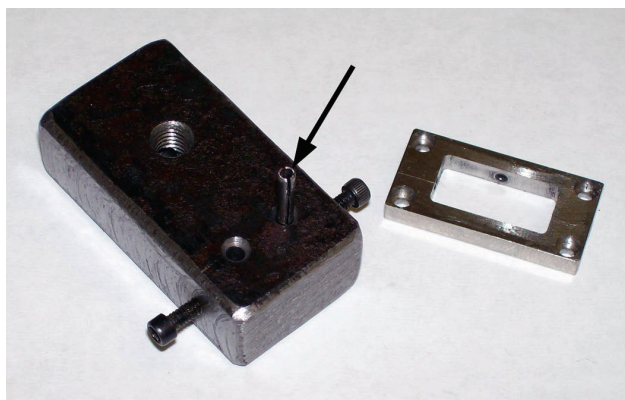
Left: Jig for dicing inconel strain relief tubes. Right: HTHFS inconel housing (1.0 in  $\times$  0.5 in  $\times$  0.125 in).
